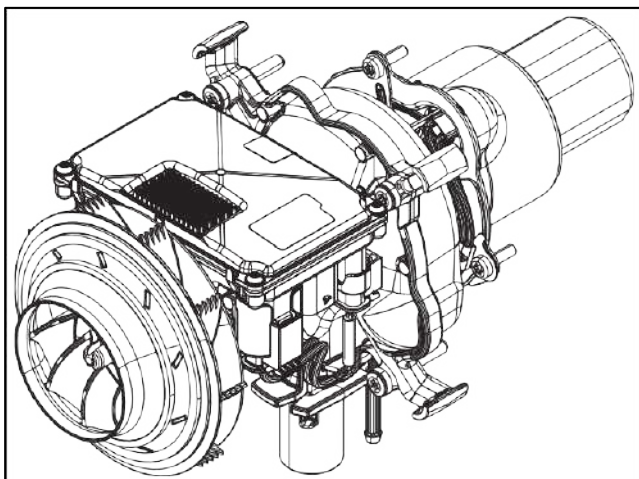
Air Top Pro 25 air heater without housing and heat exchanger
